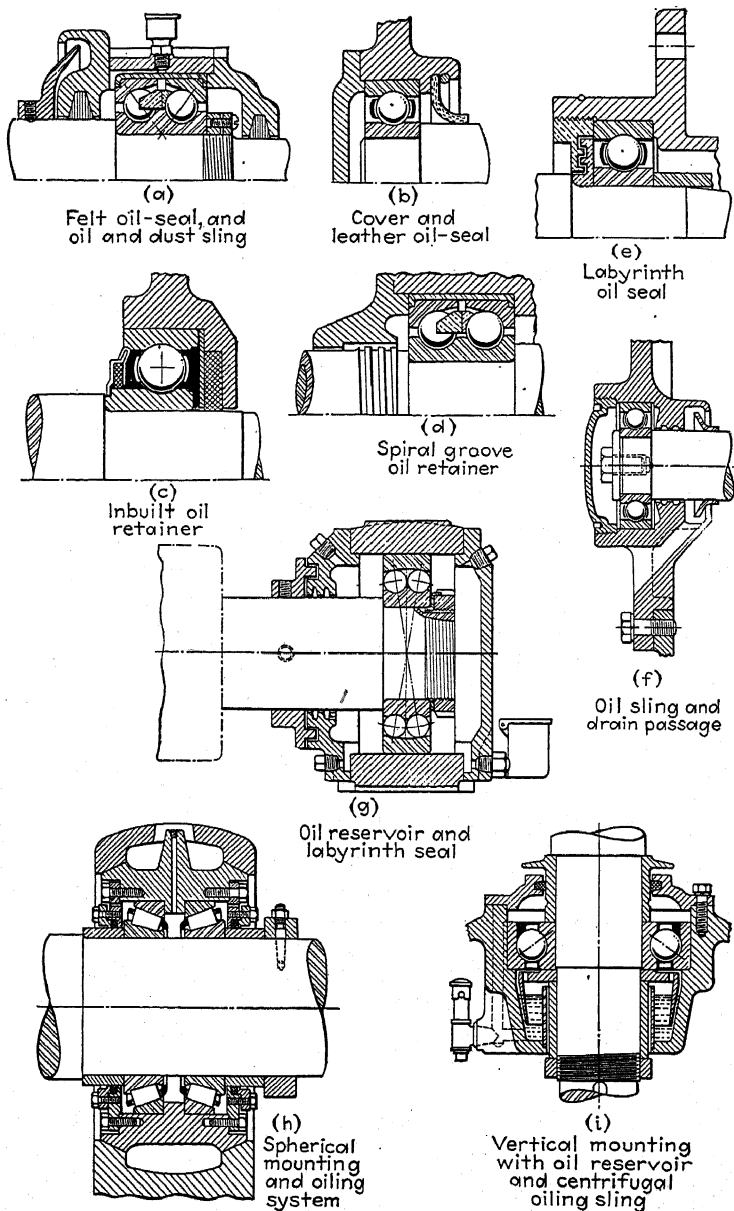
[(a)–(f) and (i) courtesy New Departure Manufacturing Company; (g) courtesy SKF Industries, Inc.; (h) courtesy Timken Roller Bearing Company.]
